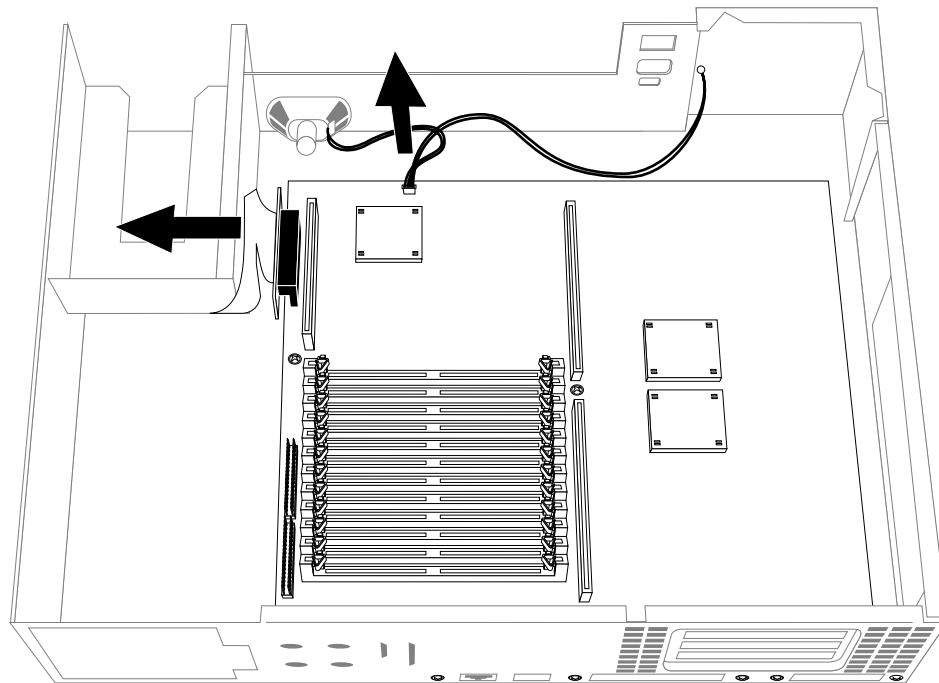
Disconnecting Cables From the IP22 System Base Board
